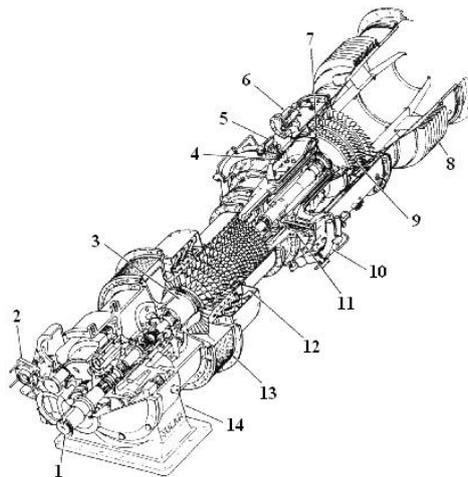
Single shaft turbine: 1 – output shaft; 2 – accessory drive; 3 – compressor rotor; 4 – fuel injector; 5 – combustor housing; 6 – bleed valve; 7 – turbine shaft; 8 – turbine exhaust diffuser and bellows; 9 – turbine rotor; 10 – fuel manifold; 11 – compressor diffuser; 12 – compressor variable vanes IGV; 13 – air inlet; 14 – gearbox. The combustion chamber is designed as an annular inline construction with a single component internal casing and fuel injectors. The fuel injectors are inserted and flanged from outside the casing.
